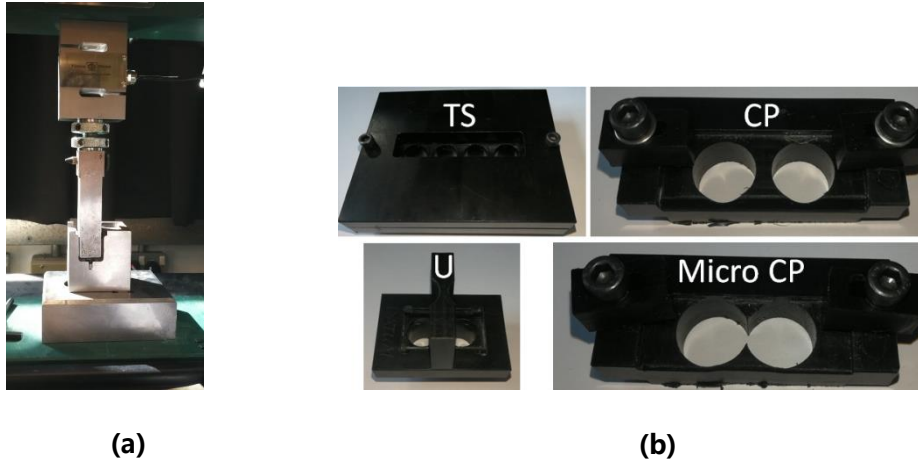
(a) Bending rig for manufacture U-shape samples and (b) welding jigs for each type of sample geometries.
